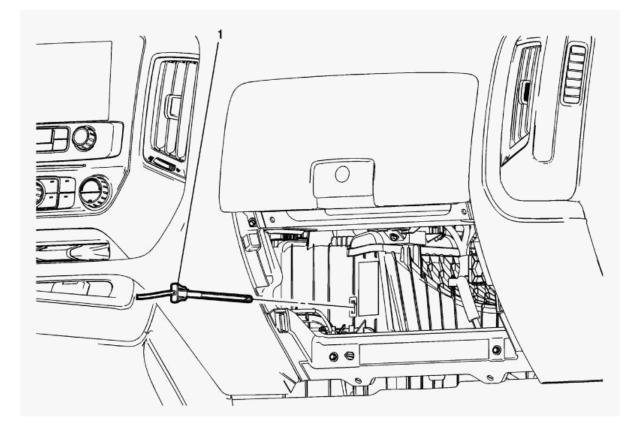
Evaporator Air Temperature Sensor Courtesy of GENERAL MOTORS COMPANY
